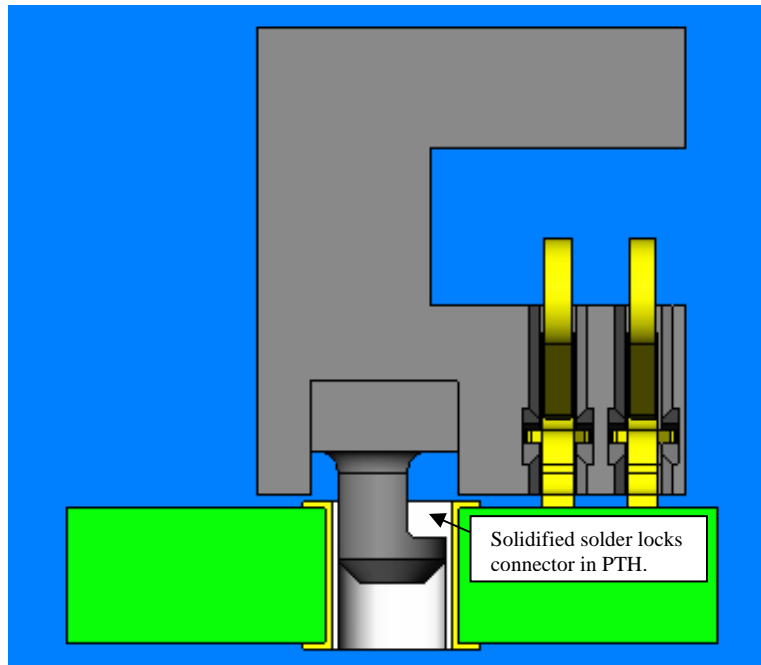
Solidified solder locks the connector in place by filling the undercut.
